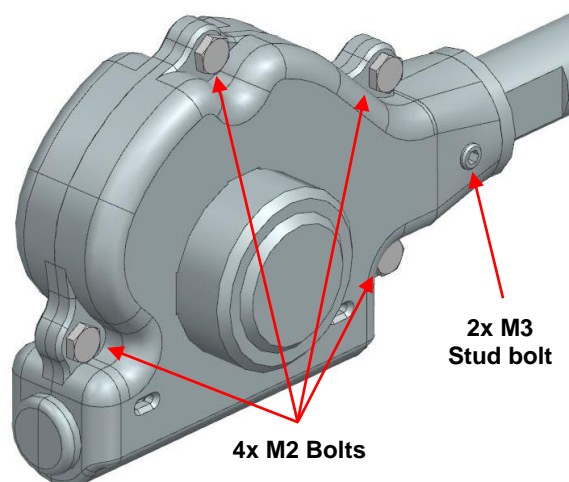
Bolt parts of the case assembly. Source: Own elaboration.
